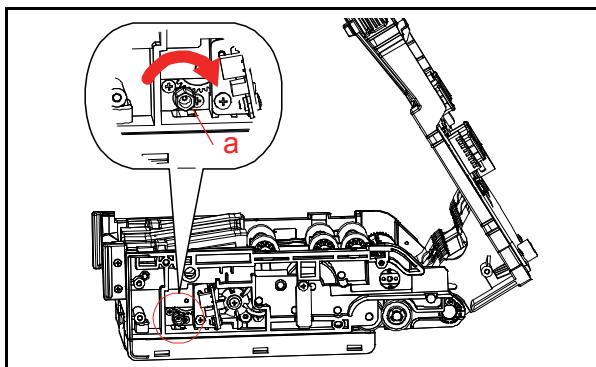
Lower Barcode Sensor Board and Lower Sensor Board Removal
